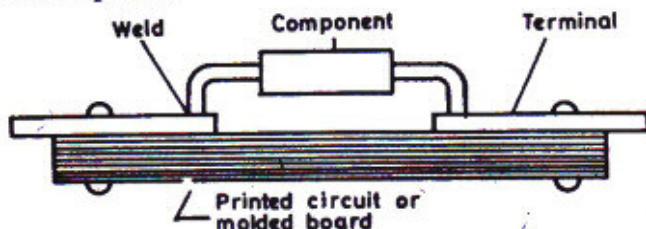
Electronic component welded to terminals by percussion welding.
